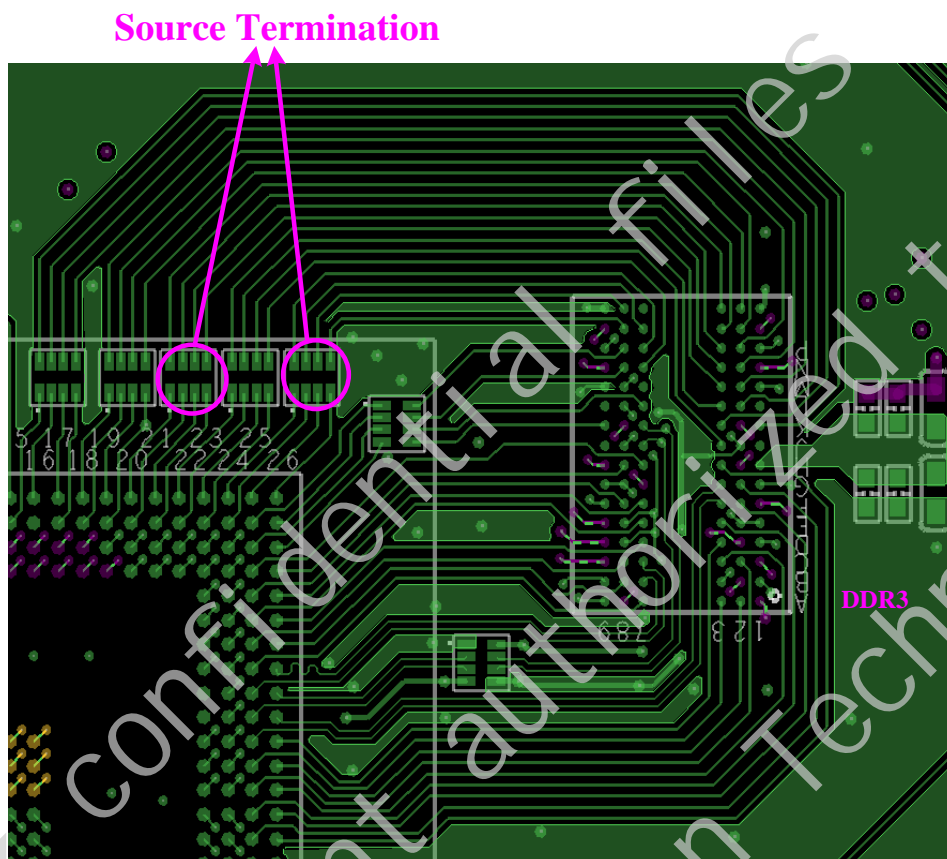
DDR3 Layout Reference for 4-Layer PCB
